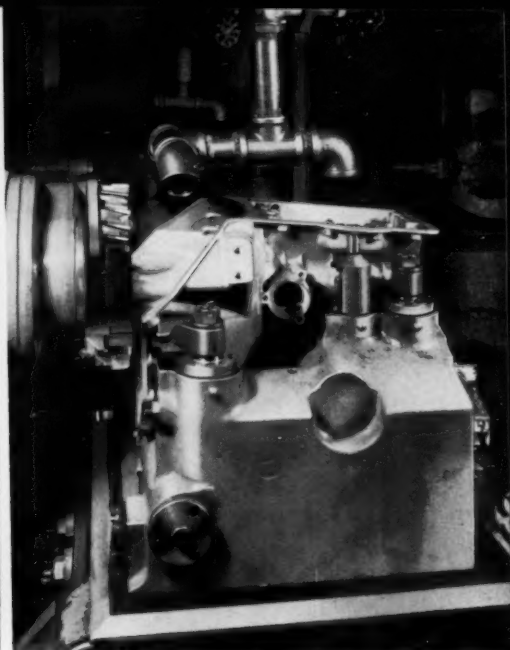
At this planetary milling station a small milling cutter can cover entire motor-mount face.
